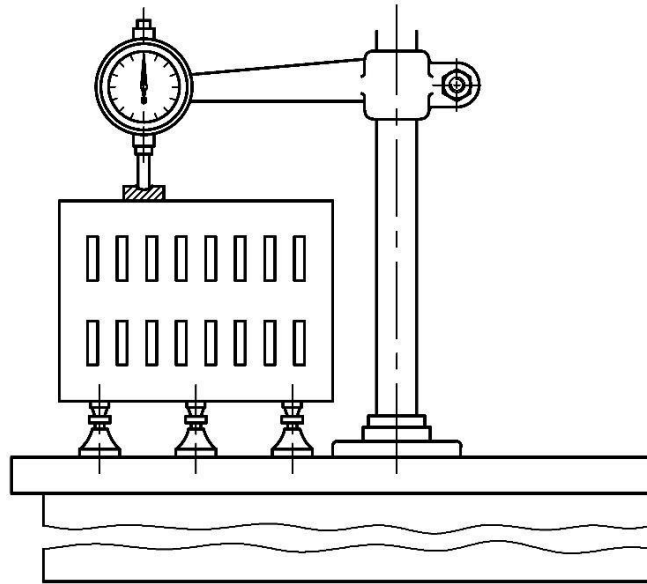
COMPARATIVE METHOD WITH SURFACE GAUGE
